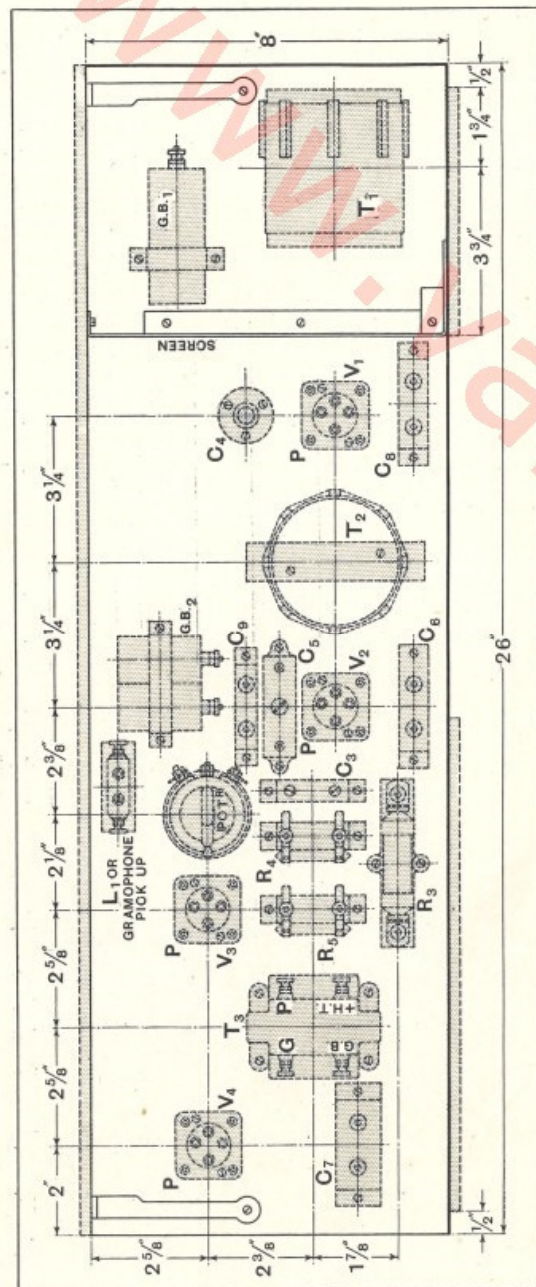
Arrangement of parts on baseboard. See Fig. 1 for values of components.
